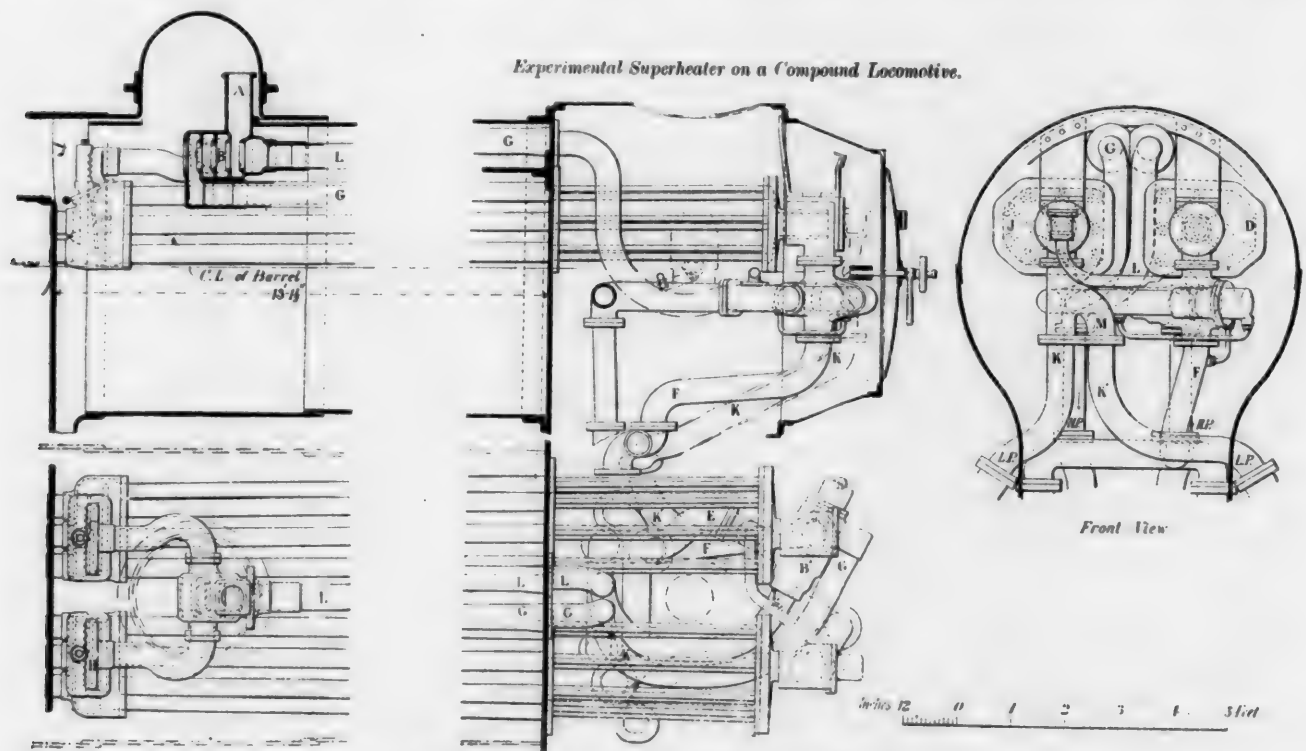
COCKERILL LOCOMOTIVE SUPERHEATER.
